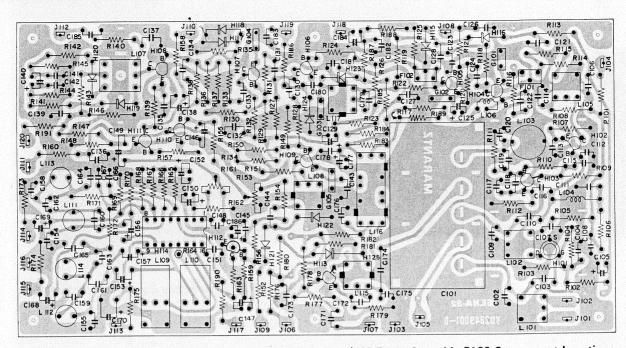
FM/AM Tuner Assembly P100 Component Locations
